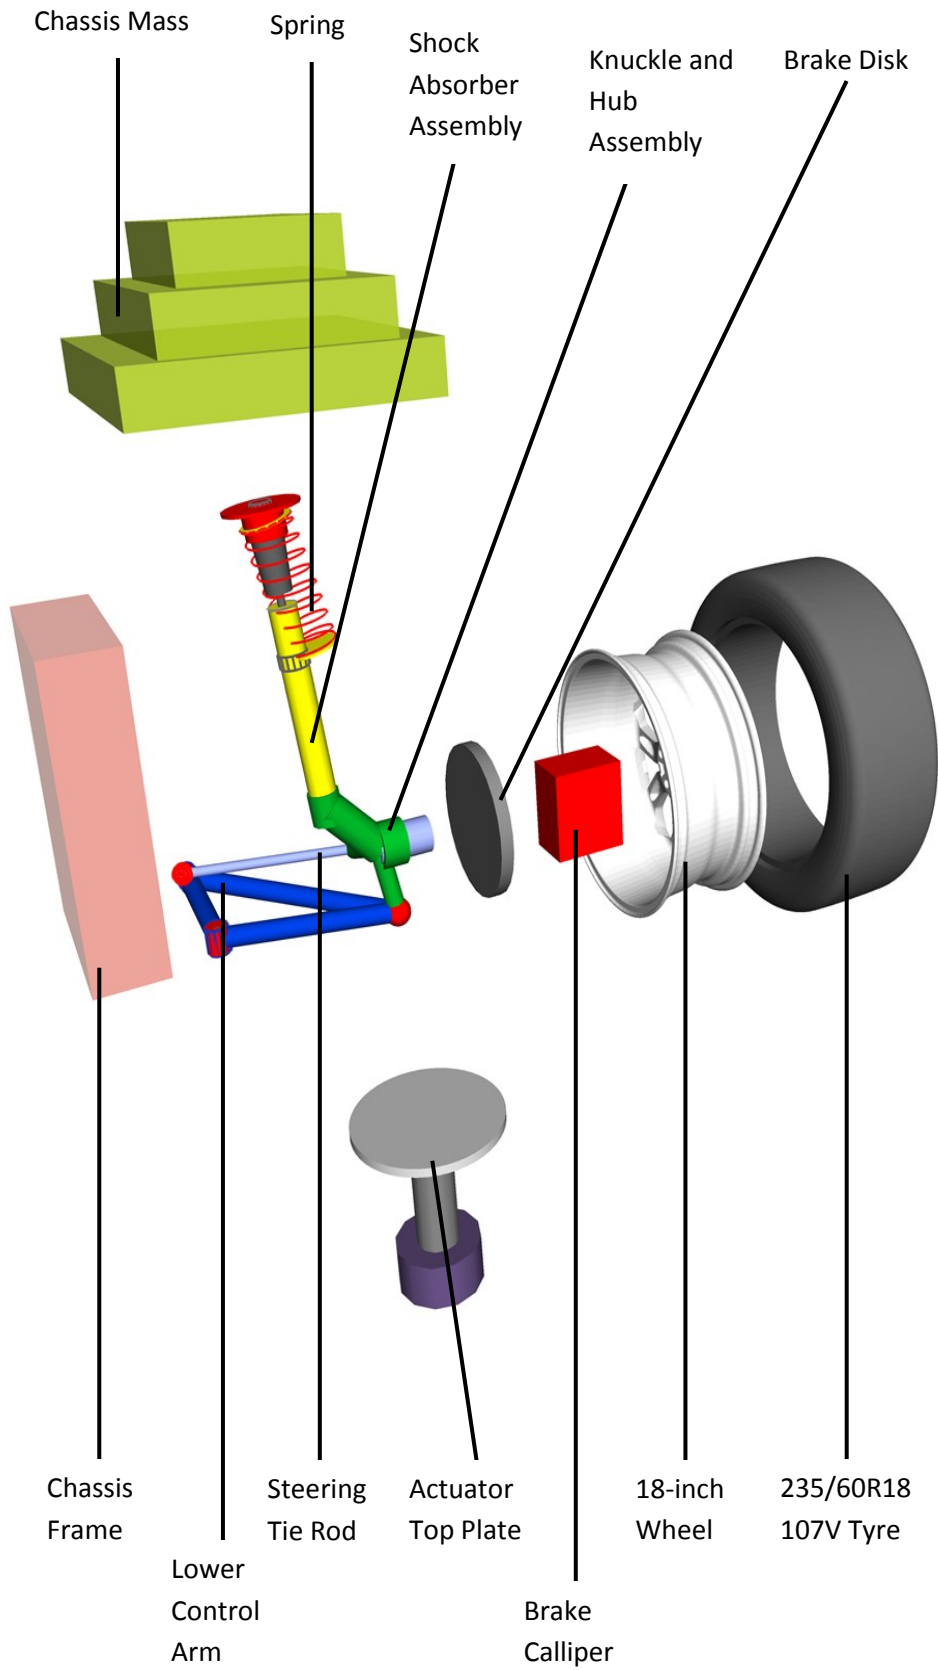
Exploded View of Quarter Vehicle Test Rig Model
